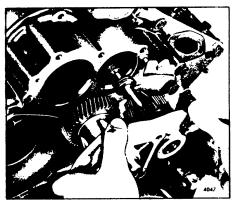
Removing/installing Blower Drive Support (6V-53 Engine)
